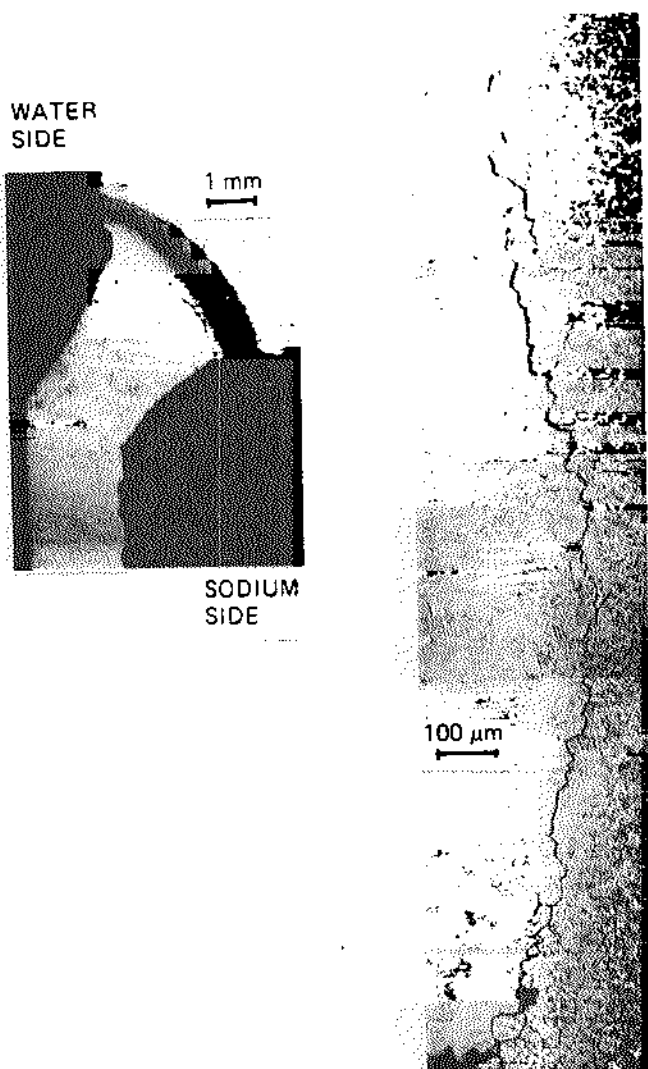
Circumferential crack propagating along the fusion line on the plate side of a weld.
